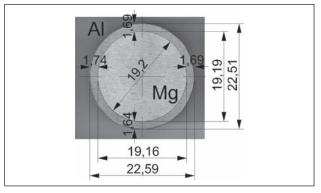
The shape and dimensions of bimetallic feedstock after explosive welding (cross-section) [4]
